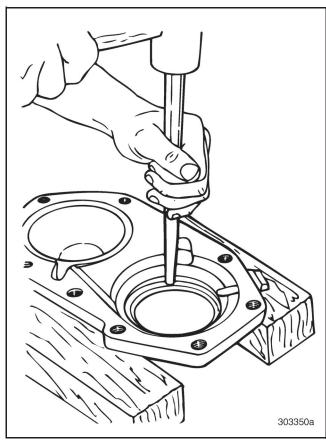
Removing Input Yoke Seal from Cover (Mainshaft/Countershaft Bearing Cover Shown)
